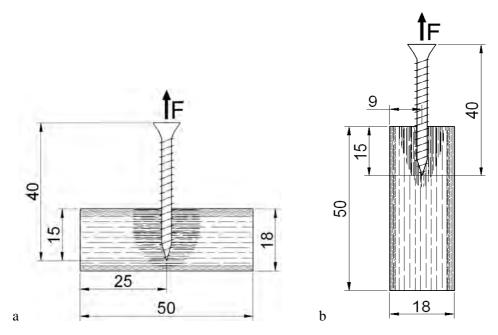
Screws mounted in the holes of the modified composite in the: a – wide and b – narrow board planes.
